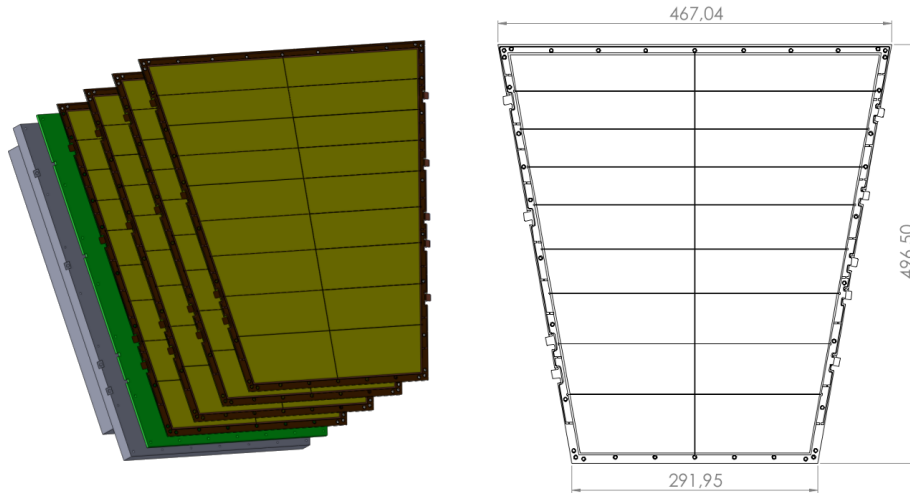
Left: Exploded view of a GEM IROC. Right: dimensions (in mm) of an IROC GEM-foil.
